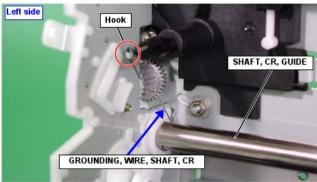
GROUNDING, WIRE, SHAFT, CR Removal
